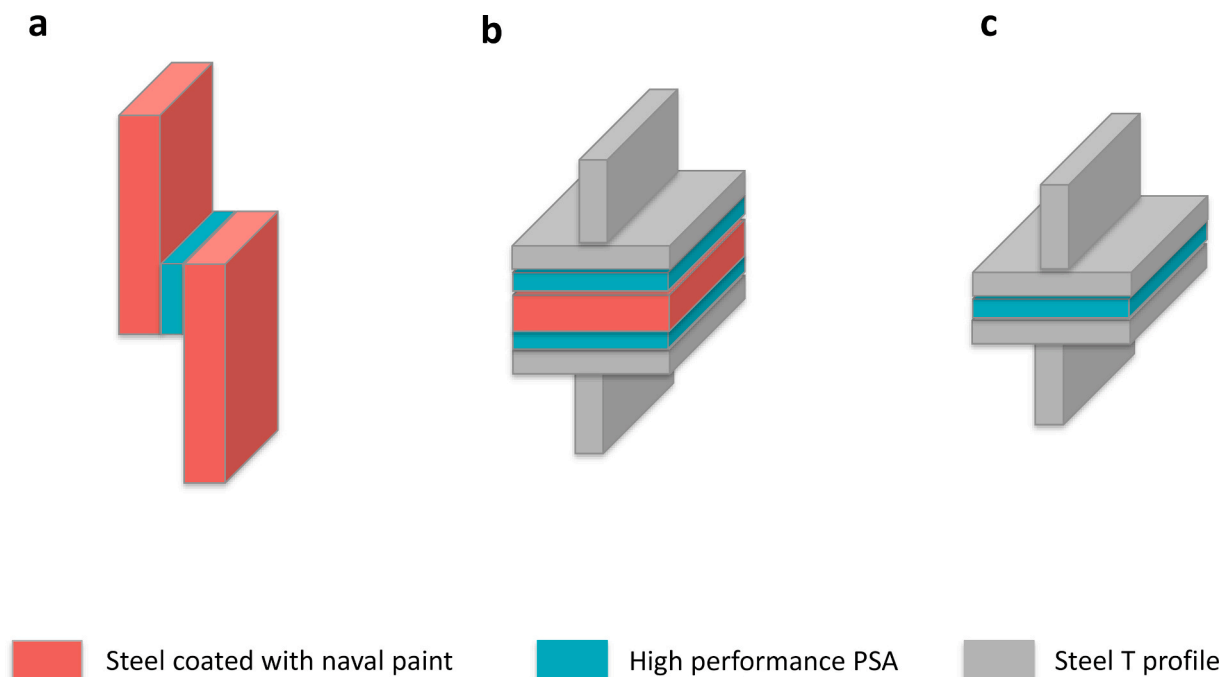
Joint assemblies to perform: (a) shear tests to painted samples, (b) tensile tests to painted samples, and (c) tensile tests to bare samples.
